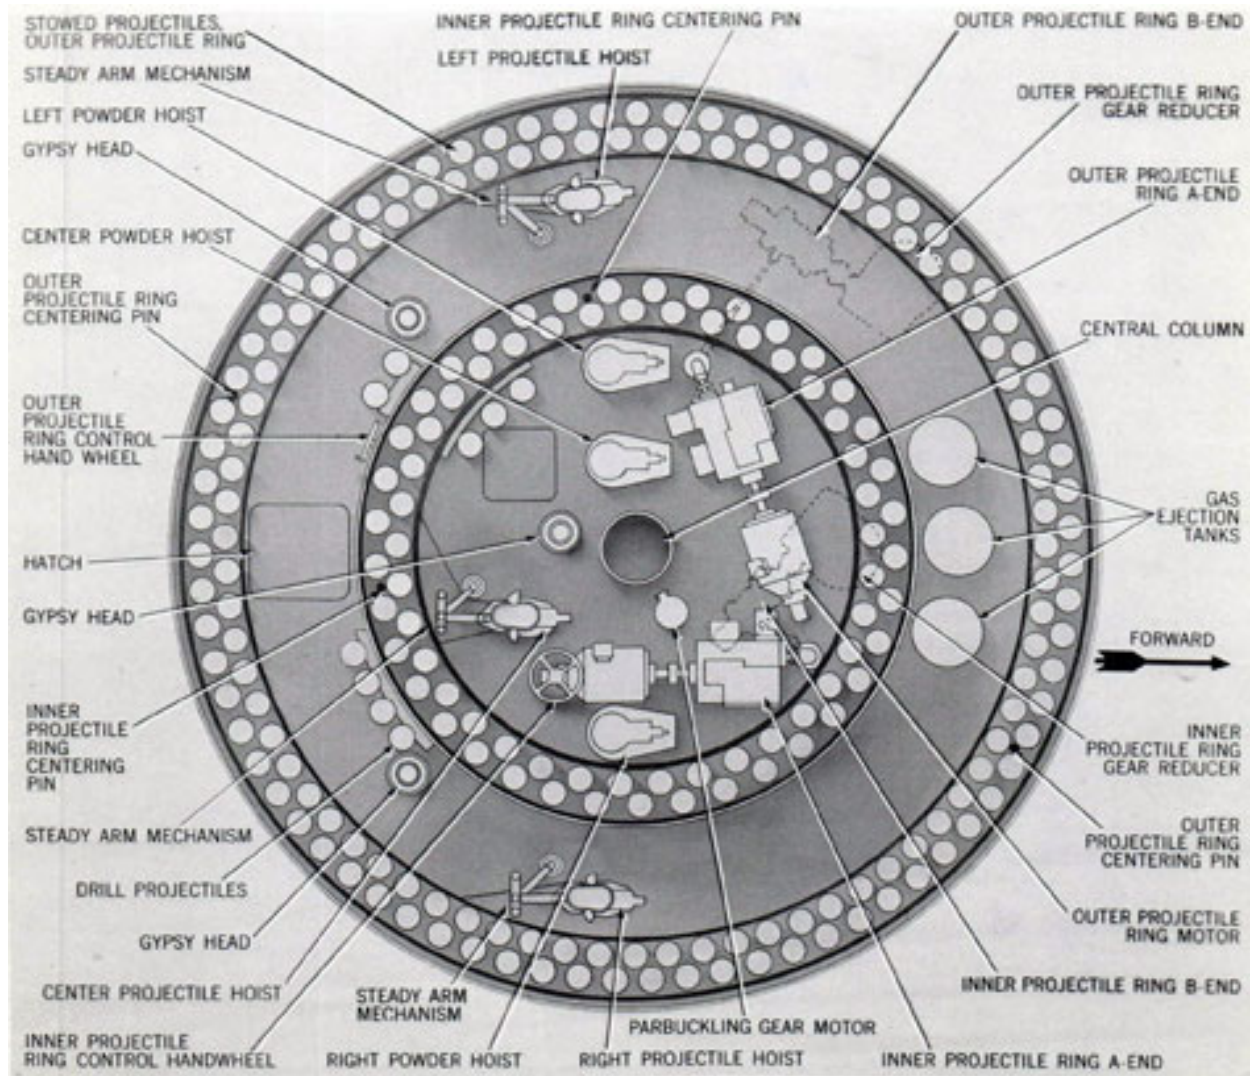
Ordnance Equipment on Lower Projectile Flat General Arrangement. Plan View
